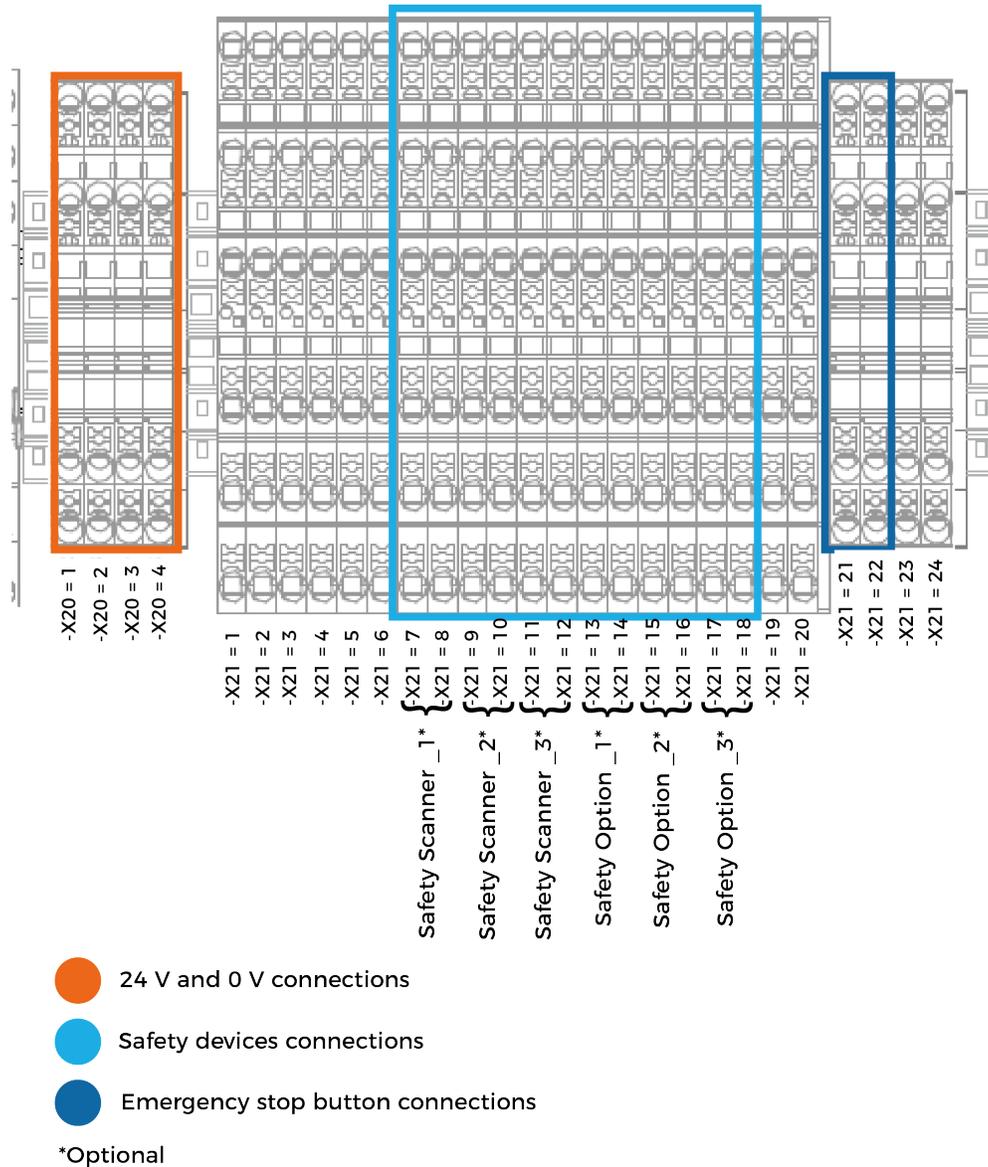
Terminal Banks -X20 and -X21 Used for Safety Connections
